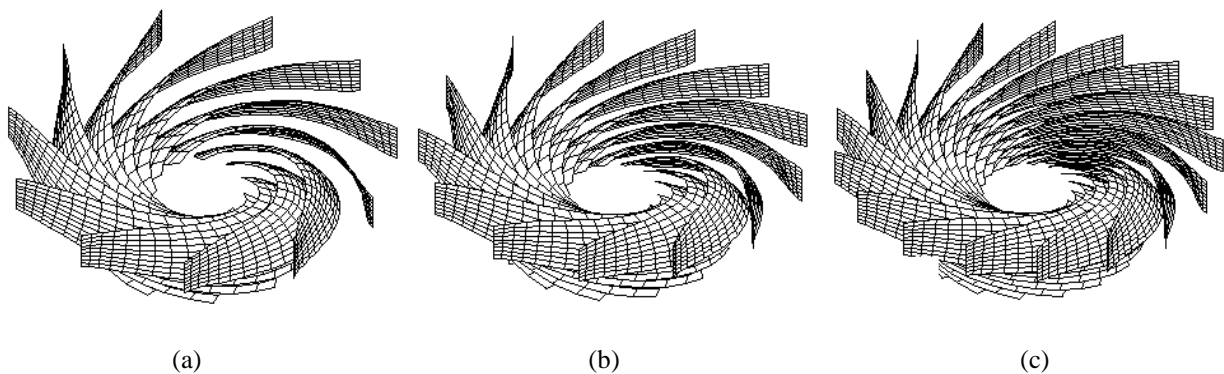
3D view of the runners with (a) 11 blades, (b) 13 blades and (c) 17 blades
